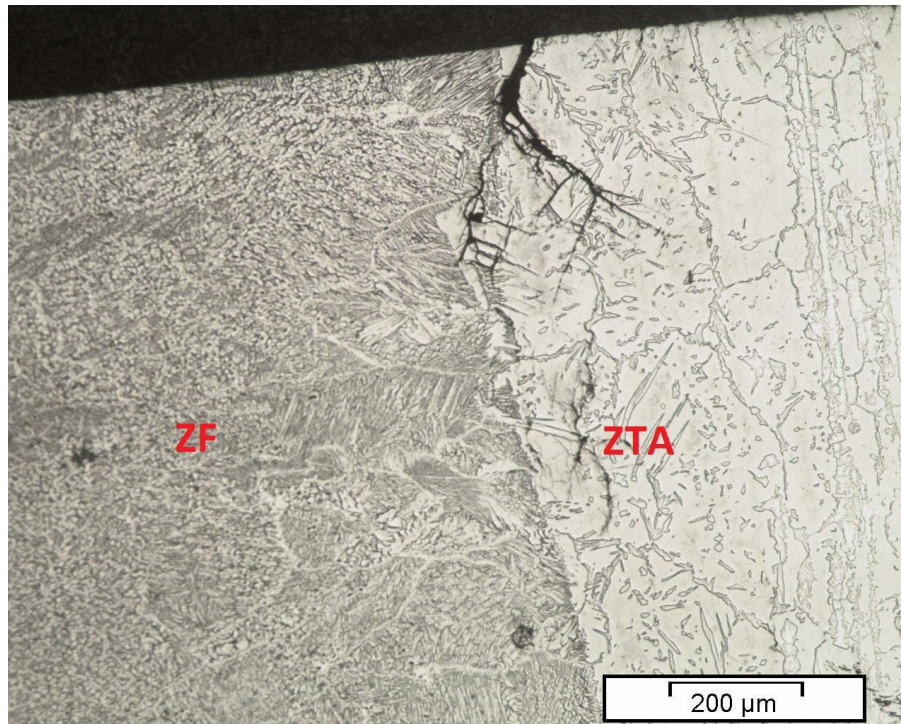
of stress corrosion cracks in the bonding zone of the welded joint with the base metal 310. electrolyte Attack: Oxalic Acid
